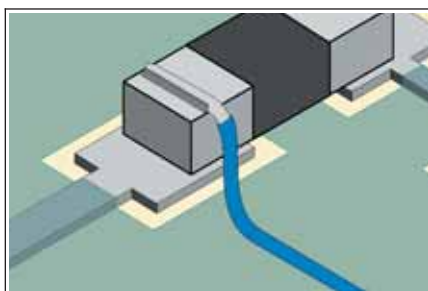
Not recommended Wire soldered parallel or perpendicular to component.
